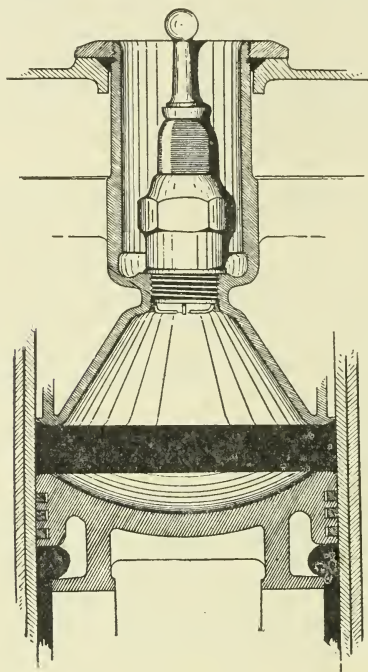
SECTIONAL ELEVATION THROUGH THE COMBUSTION-CHAMBER OF THE ENGINE USED ON THE TYPES-J AND L BUSES
